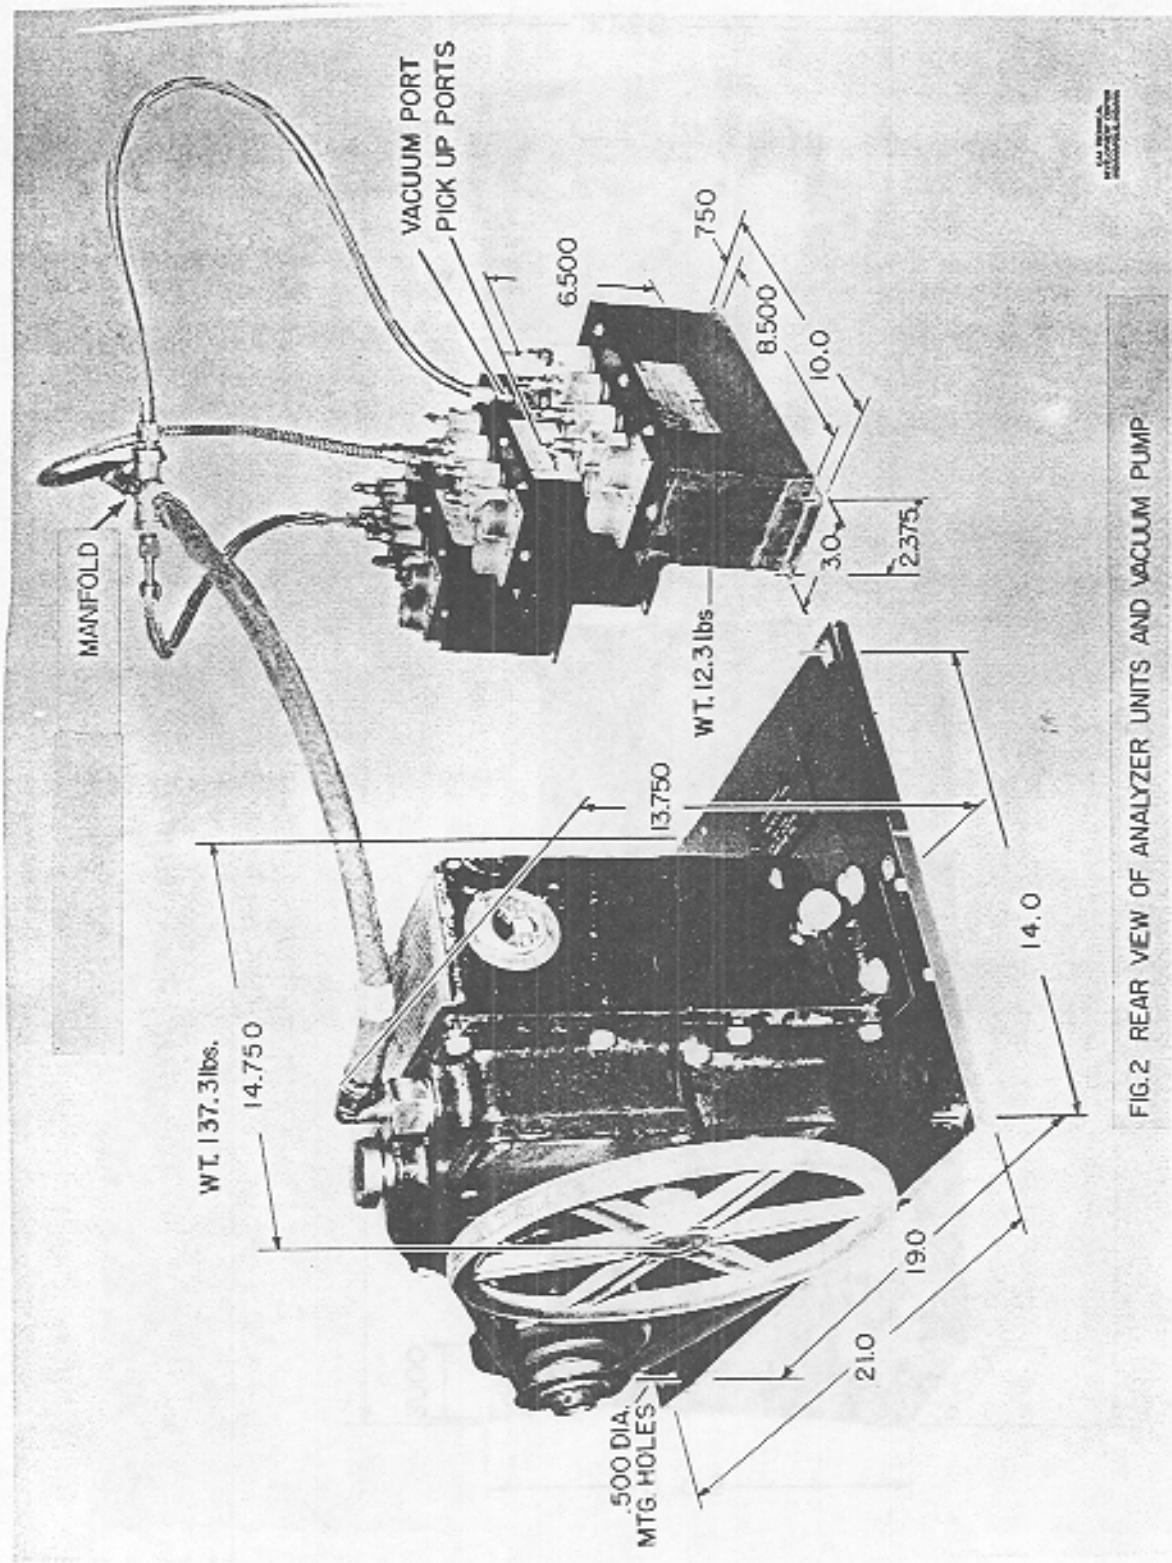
REAR VIEW OF ANALYZER UNITS AND VACUUM PUMP
